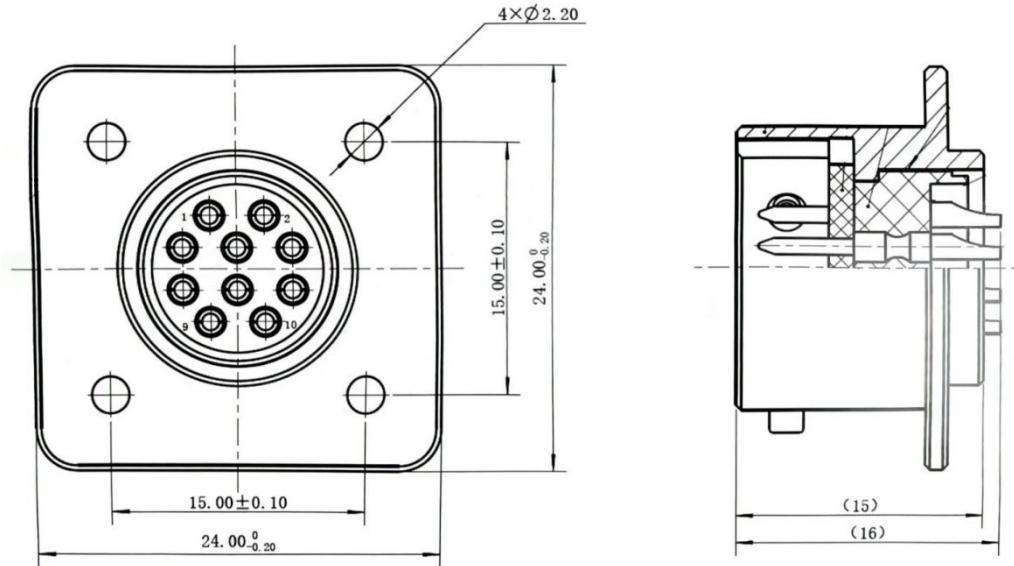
ZH127-1-10/14-B1-1-B receptacle product dimensions drawing
